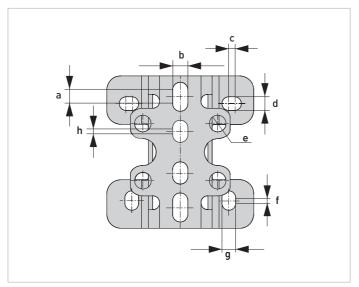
Mounting bracket (pipe and wall mounting 2" / 50.8 mm)
